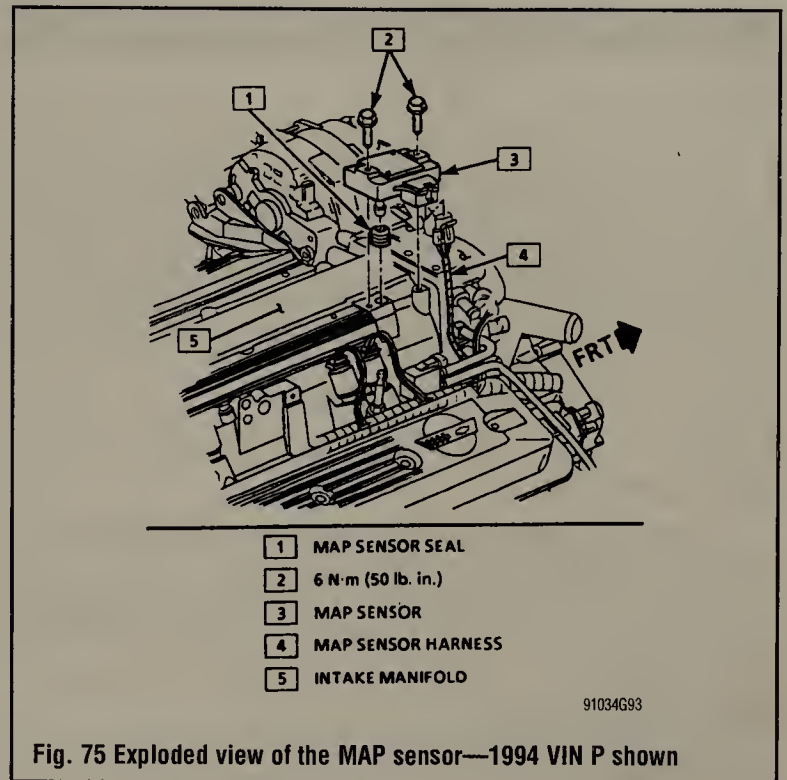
Exploded view of the MAP sensor—1994 VIN P shown
